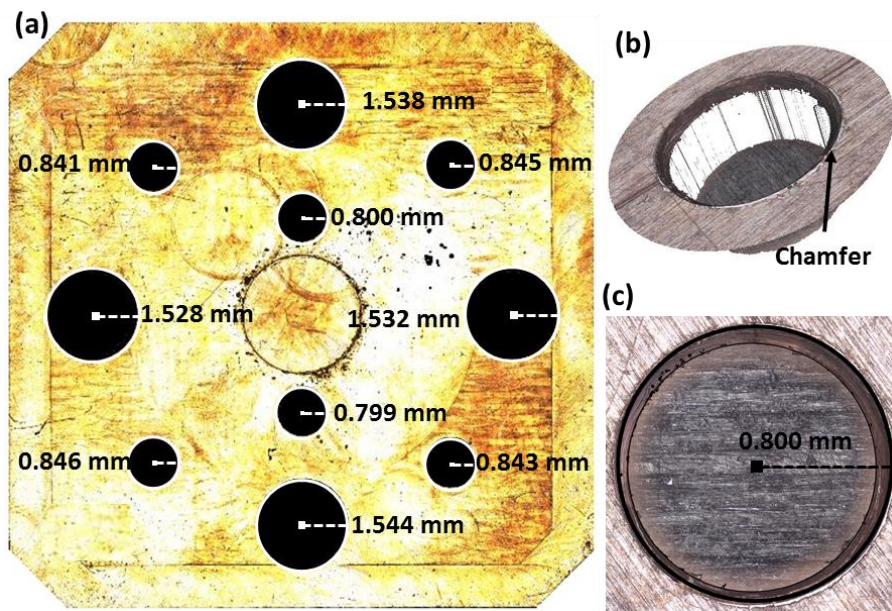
A representative sample with drilled alignment and fixing holes prior to the laser machining of the waveguide functional structure: (a) top view of the sample with dimensions of drilled alignment and fixing holes, (b) 3D view of one alignment hole and (c) top view of the alignment hole from (b) with its dimensions
